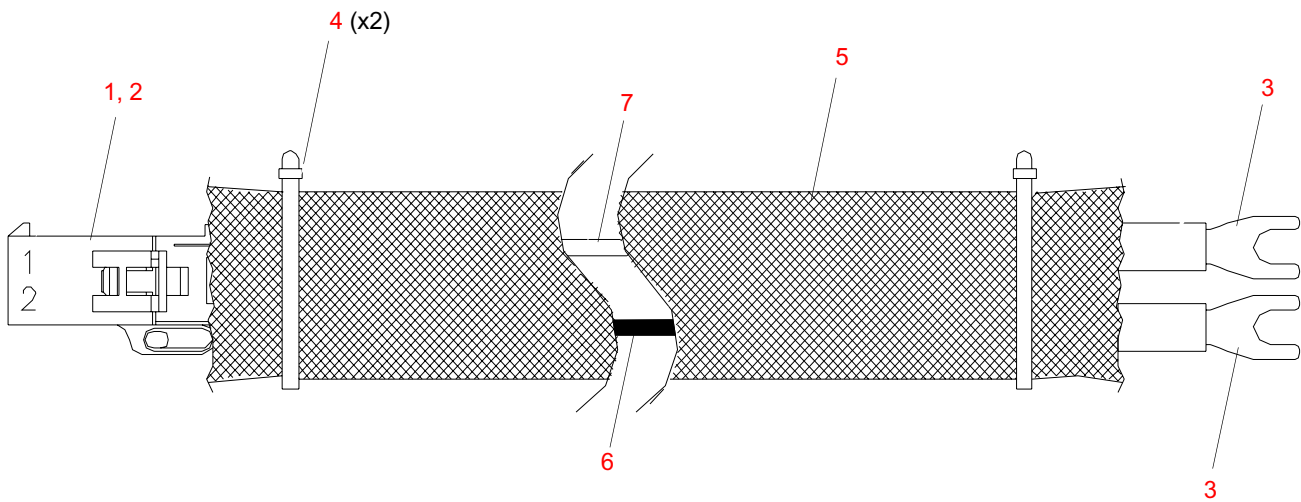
Lamp Supply to Relay Cable Assembly
